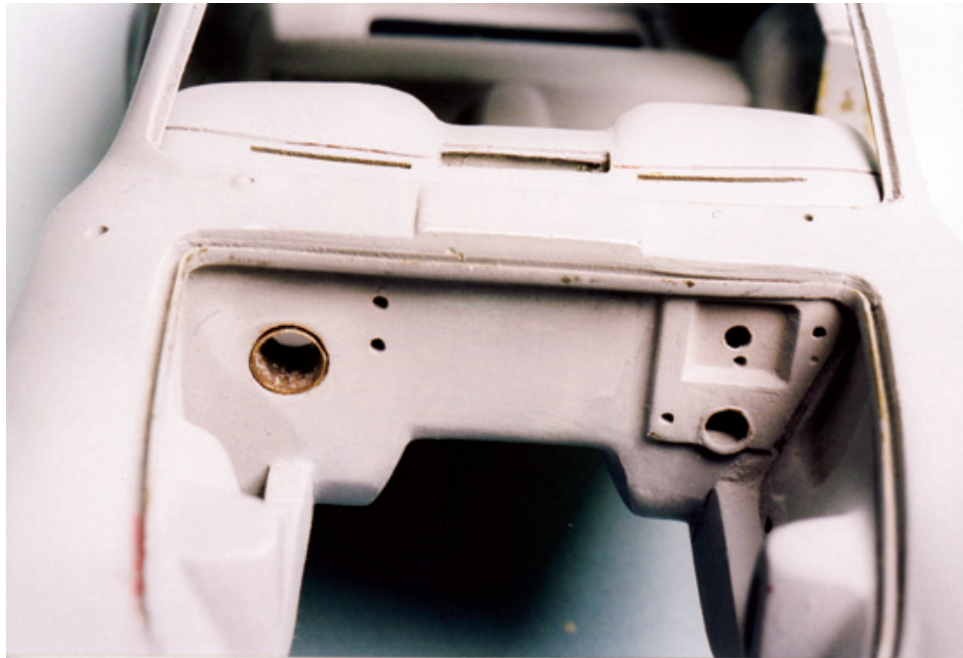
The dashboard of the Lynx is a composite of styrene and brass. This entire subassembly has been fitted to the unibody, and will be fully detailed (machined instruments, photoetch instrument faces, operating dash/radio/glove box lights) before placement in the painted model. Note the receiver for the steering column (the brass half-sleeve mounted in the correct position under the dash, and tubing on the brass firewall). The machined steering column will also be fitted and double-checked before any final finishing or assembly.
